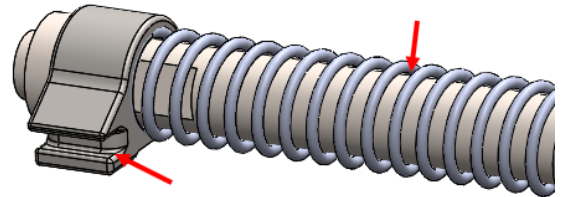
Grease Points on Op Rod & Op Rod Guide 53
